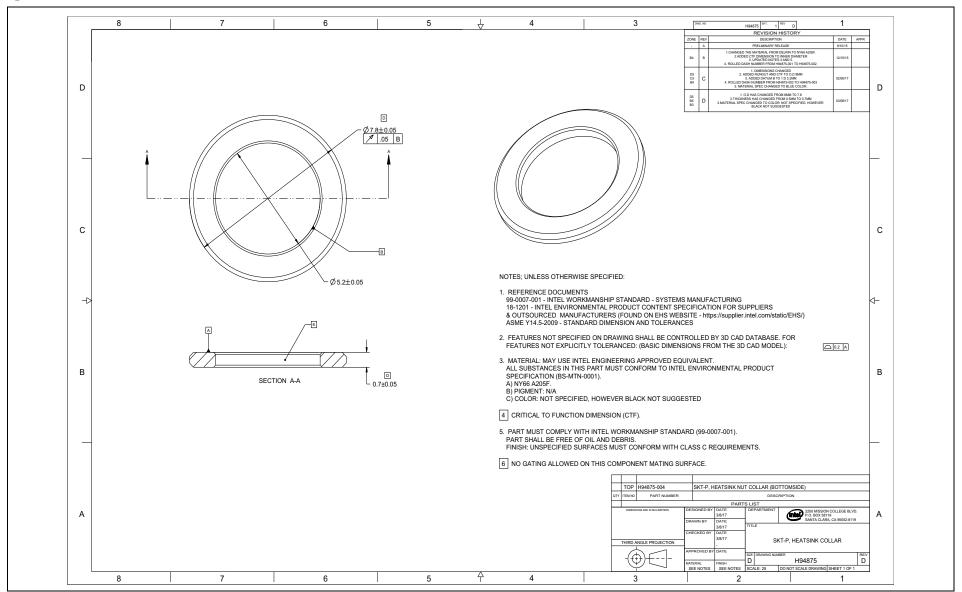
Heatsink Nut (Sheet 1 of 2)
